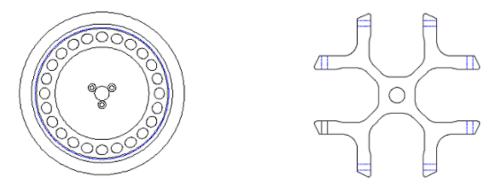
Angle Rotor (left), Swing-out Rotor (right)
